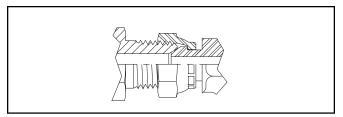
Illustration showing how NPSM swivel adapters seal on mating chamfer in male pipe thread.
